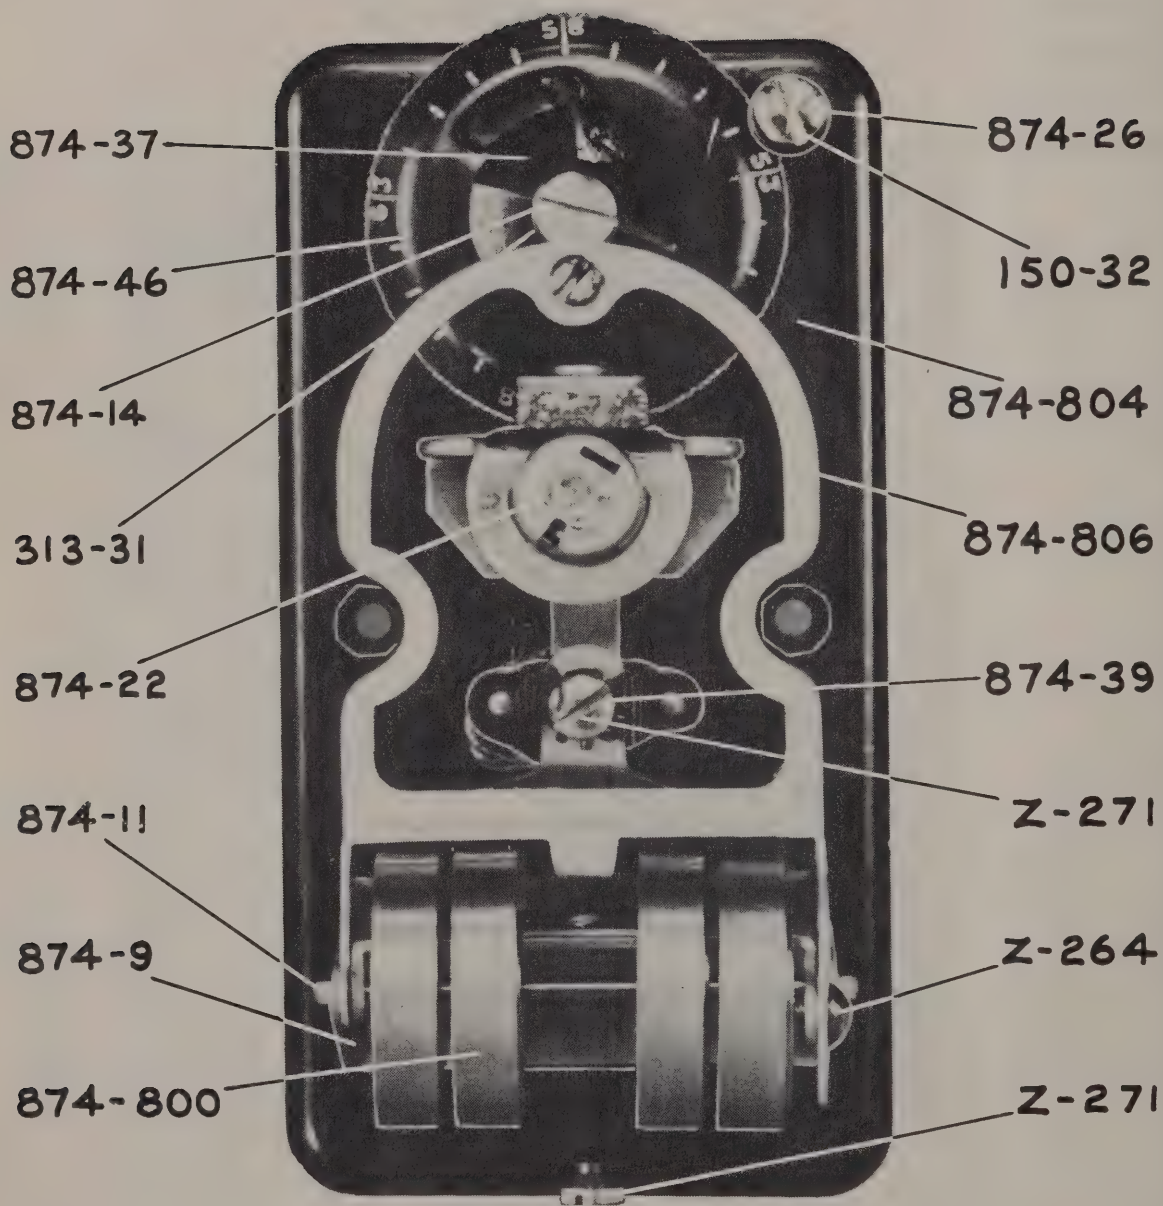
PENN ELECTRIC SWITCH COMPANY THERMOSTAT ASSEMBLY (A2-A)
